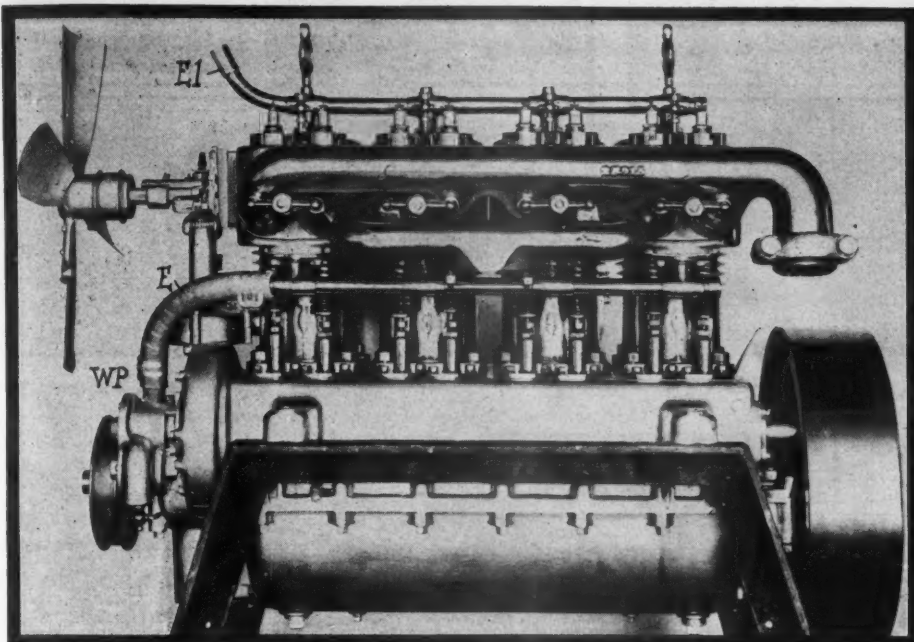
LEFT SIDE OF MOTOR USED IN GLIDE CARS IN 1911
